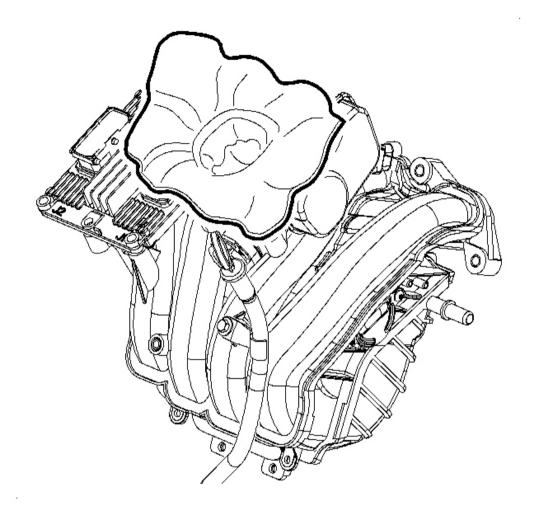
View Of Throttle Body Opening With A Shop Towel Courtesy of GENERAL MOTORS CORP.
